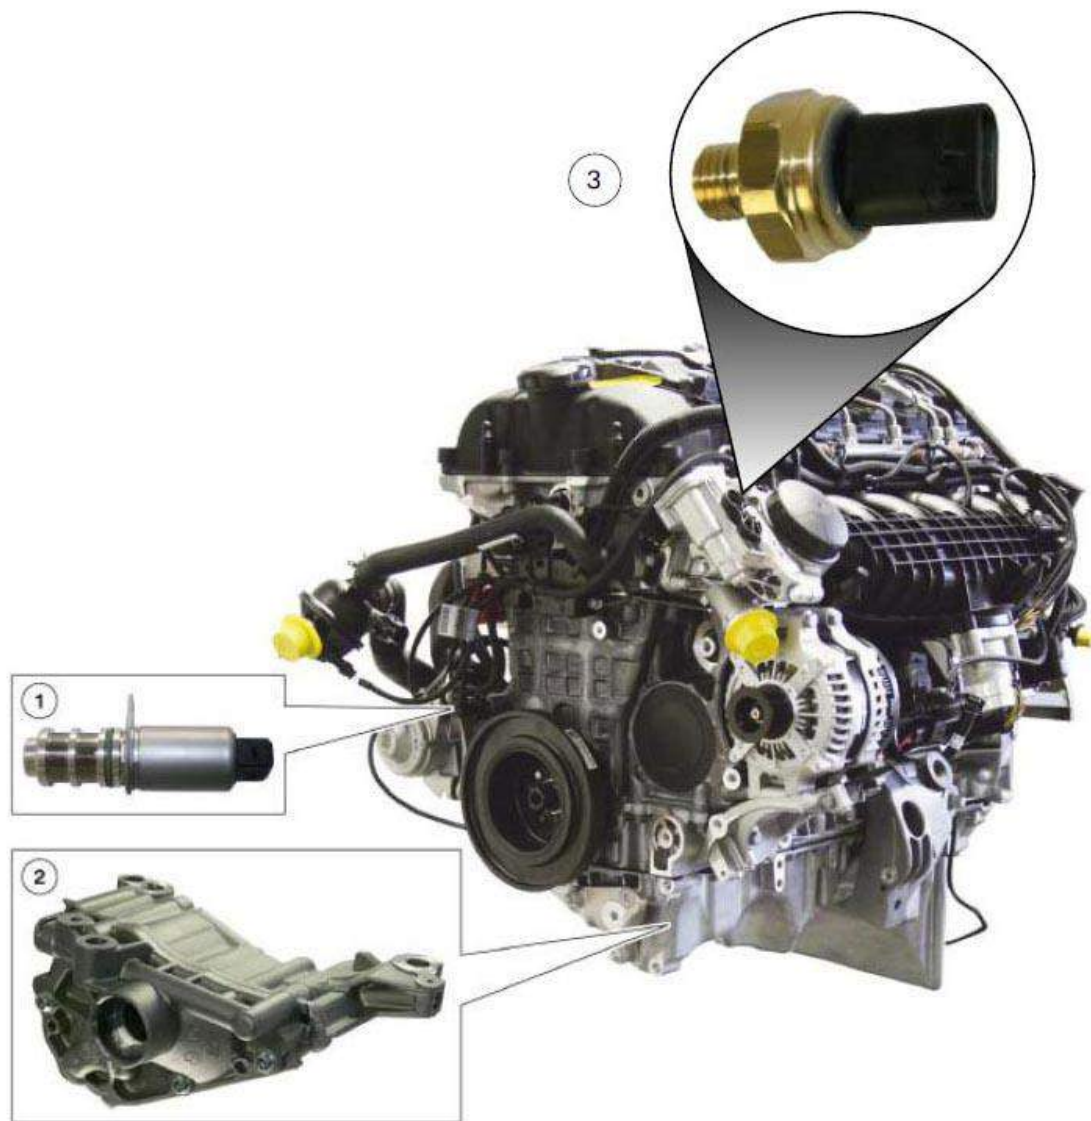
Identifying Oil Pump, Oil Pressure Sensor And Pressure Control Valve - N55
